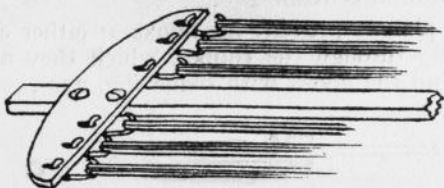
A method of attaching the fixed ends of a double set of triple elastic motors to detachable hooks carried in an aluminium crosspiece.
